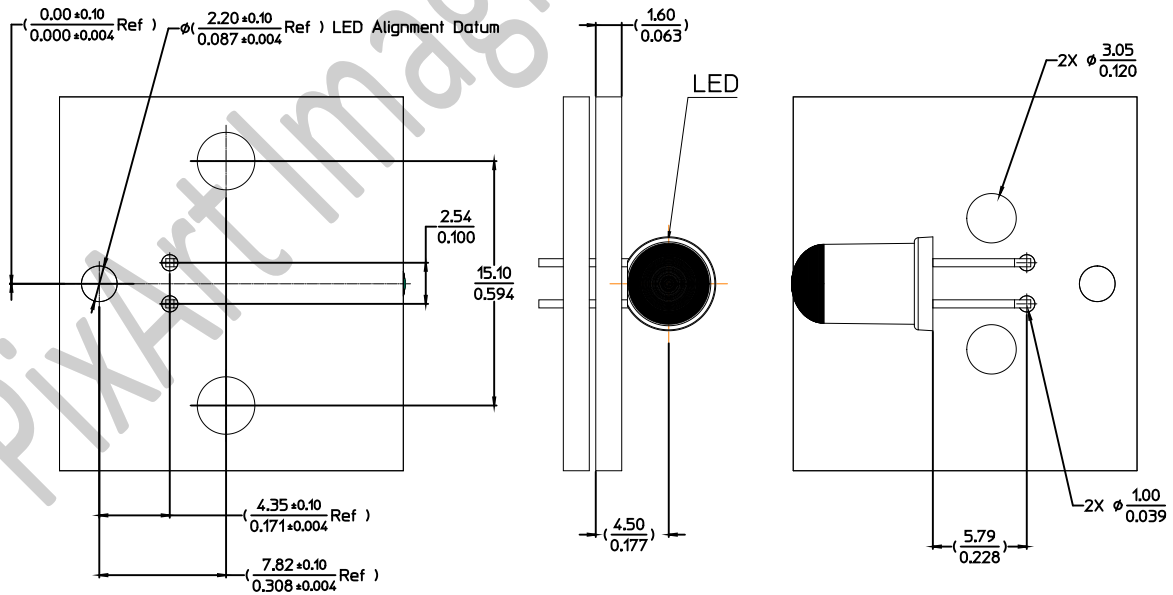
Recommended PCB Mechanical Cutouts and Spacing (Top View) for sensor
